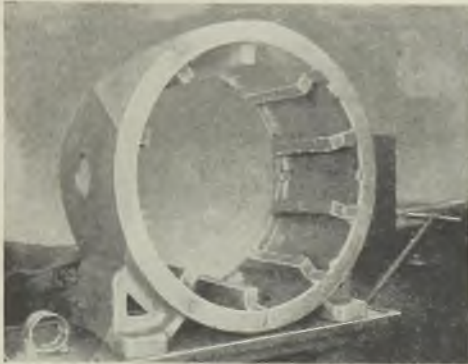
COMPLETED CASTING READY FOR MACHINE SHOP.
